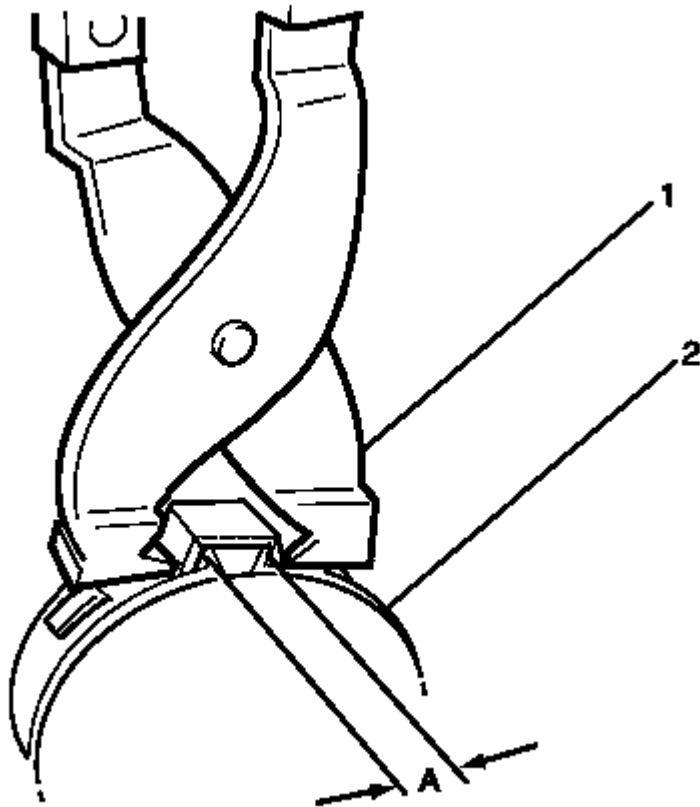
Wheel Drive Shaft Outer Joint Boot Clamp Installer
